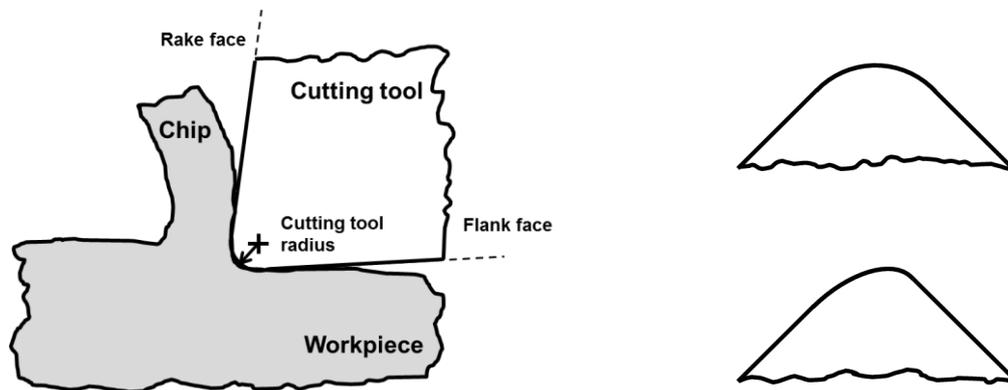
Left: workpiece and cutting tool with indicated cutting edge radius. Right: idealized symmetric (top) and asymmetric (bottom) edge roundings.
